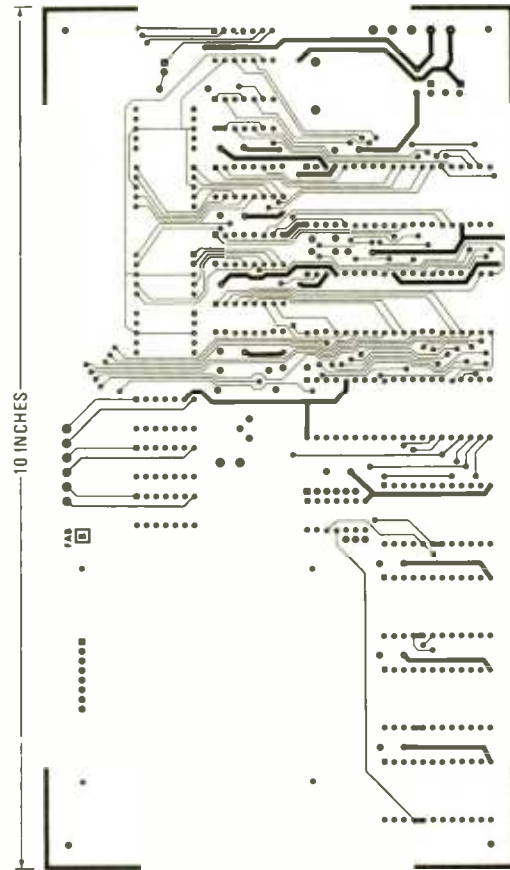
THE REAR SURFACE of the board has this foil pattern. These patterns are shown slightly smaller than half-size.
